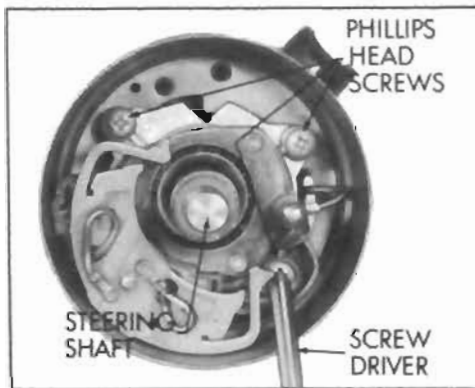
Removing Steering Shaft Upper Bearing Adapter Screws
